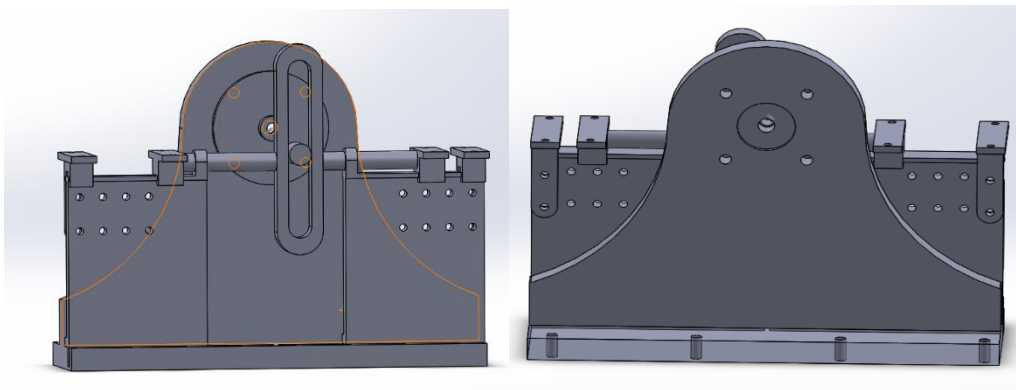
Front and back view of the mechanical test bench design with SolidWorks.
